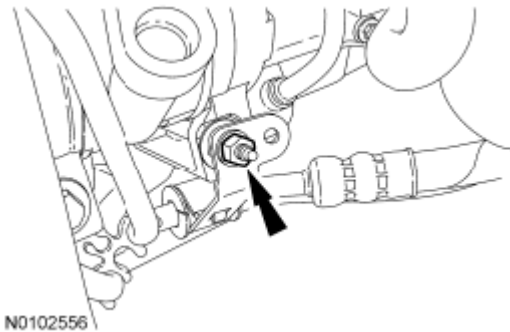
Locating A/C Compressor Stud Bolt And Nut
